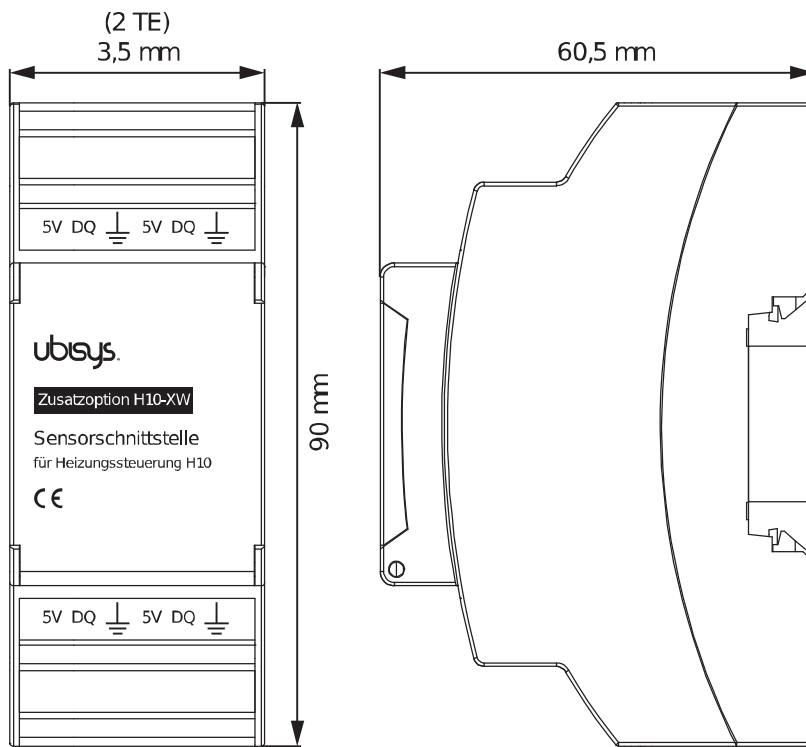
H10-XW 1-Wire® Bridge Extension Module – Dimensions
